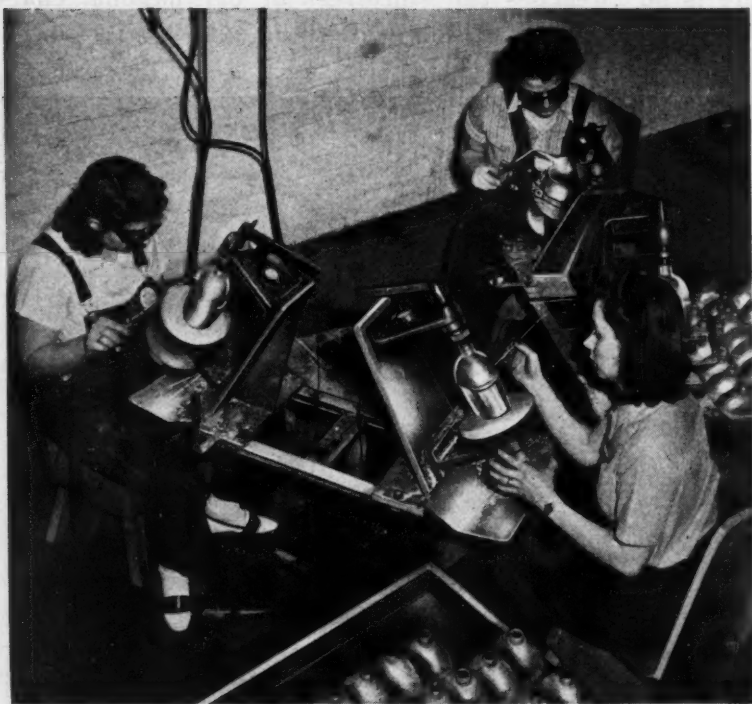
Three-girl Team Using Two Jigs for Welding Canteen. Girl at Right Applies Flux to Canteen Sections on Each Jig and Swings Them around to the Two Welders
